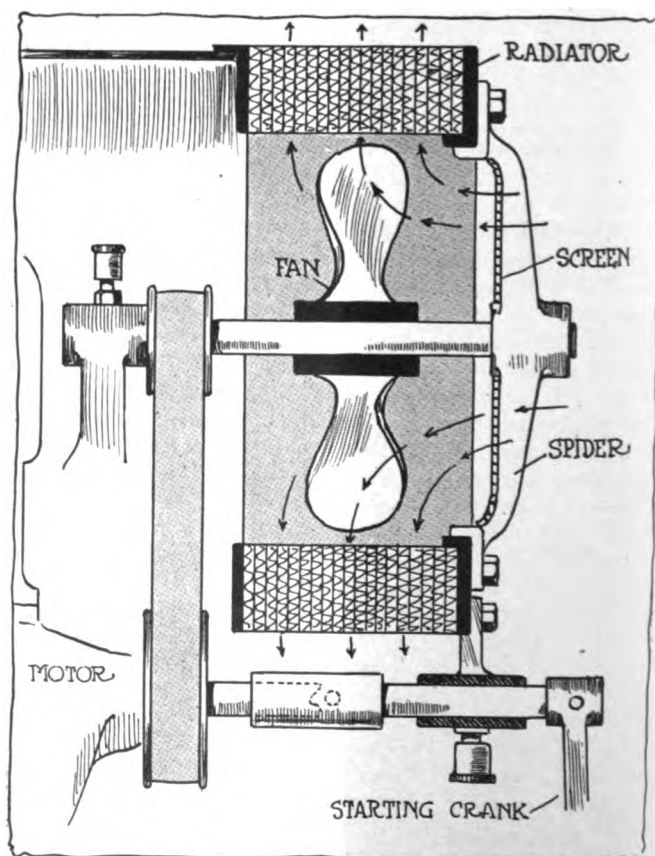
Style of radiator used on Paris buses with air propeller located within the radiator and provided with an outboard bearing
